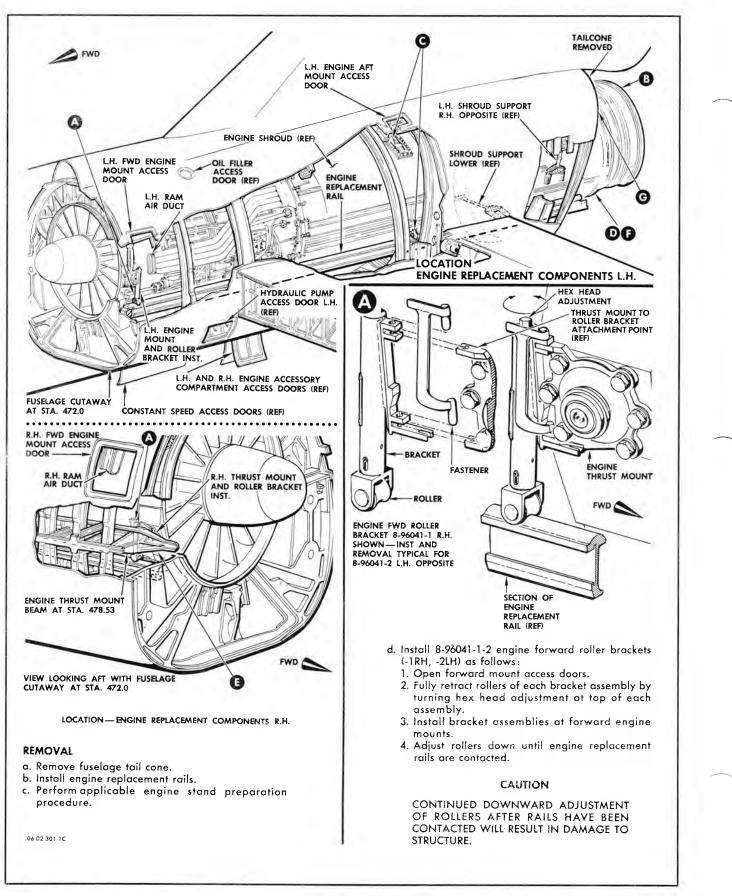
Engine Replacement (Sheet 1 of 4)
